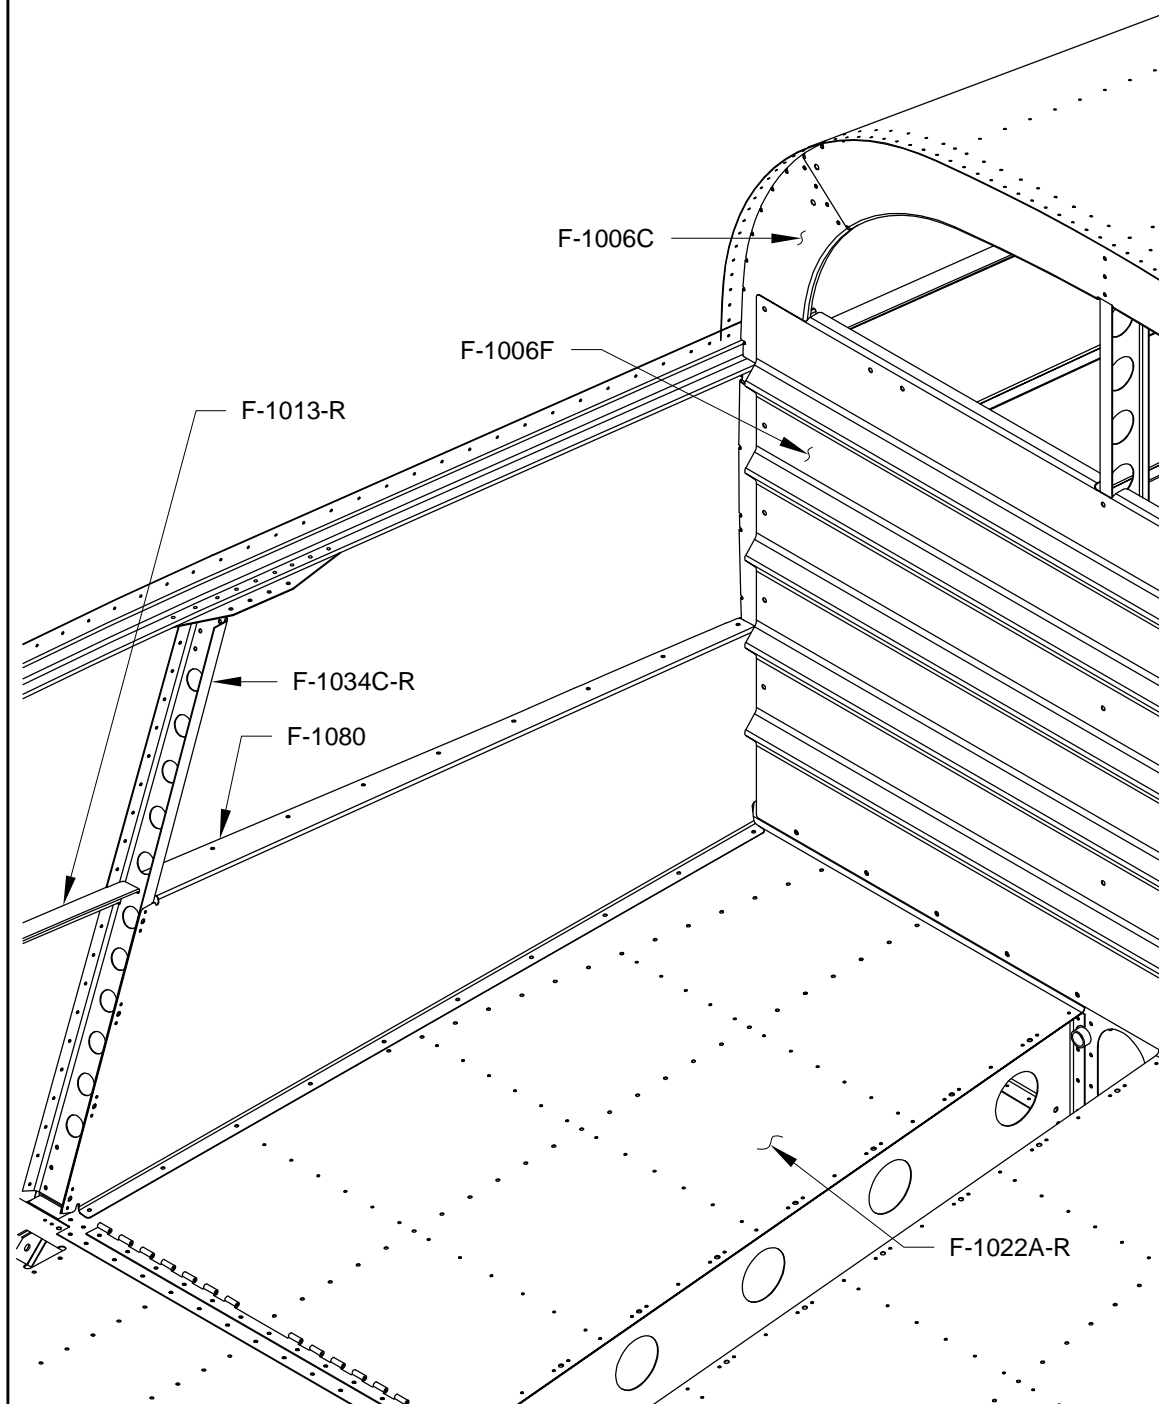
DRILLING THE RIGHT BAGGAGE COVER
